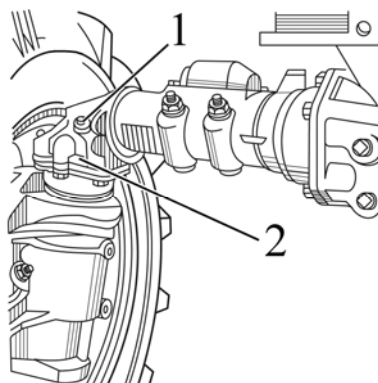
Check of oil level in intermediate bearing of FDA cardan drive
